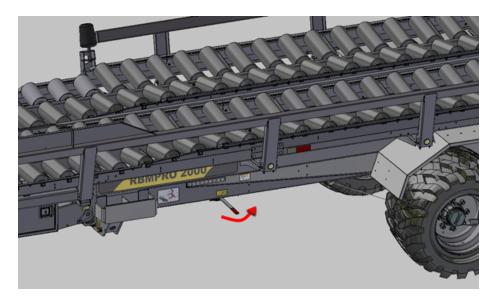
Disengaging the RBMPRO 2000 Handbrake
